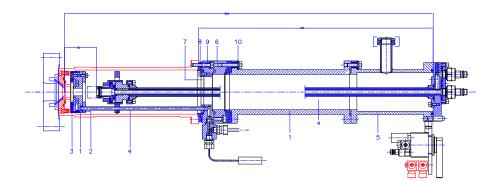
Drawing of the beamtube extension at the BC 1710 with inserted stack foil holder.
